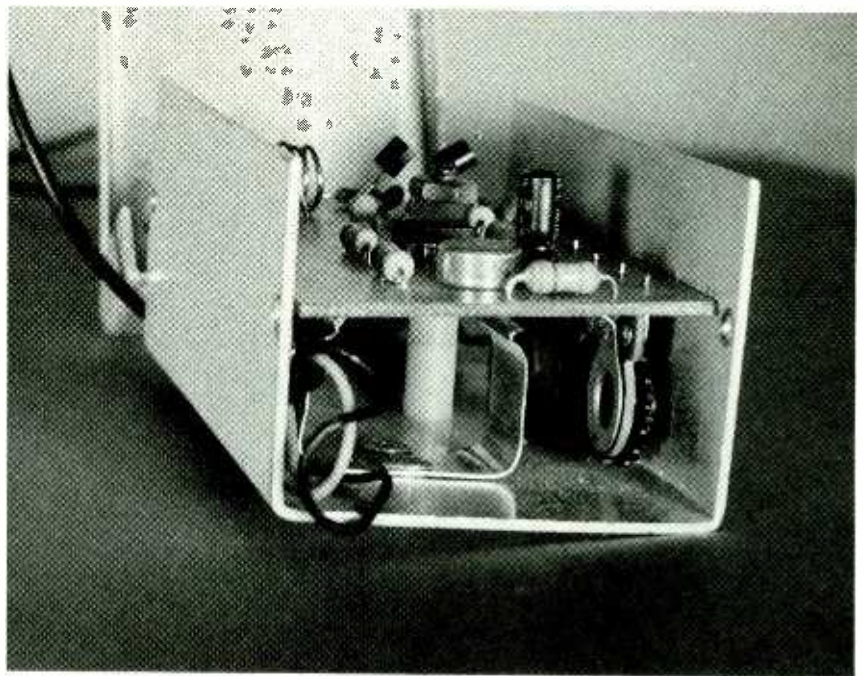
TO USE THE METAL CASE, the PC board must be cut between the two "CUT A" points indicated in Fig. 6, and the potentiometers must be mounted on the underside of the board.
